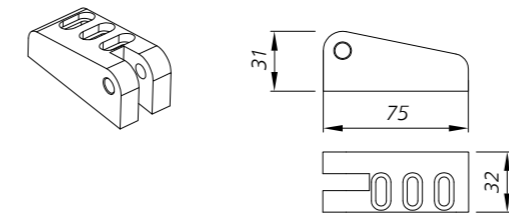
Top console for mounting type S spindle actuator on the smoke exhaust window, dimensions [mm]
